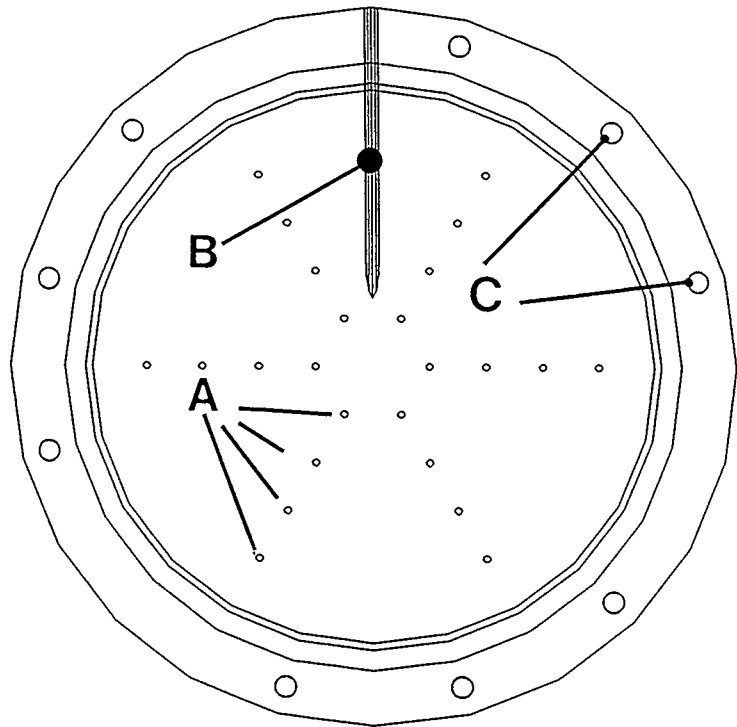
CVR Static Balloon Calibrator - Drawing #2
